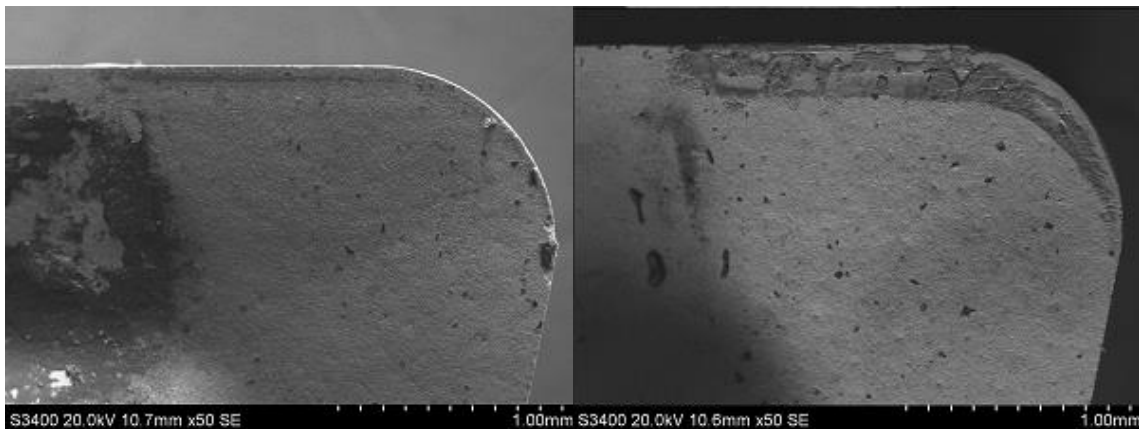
SEM images of cutting tool when cutting speed is 60m/min and feed rate is 0.05 mm/rev (left) and 0.15 mm/rev (right) after machining 30 cm<sup>3</sup>
